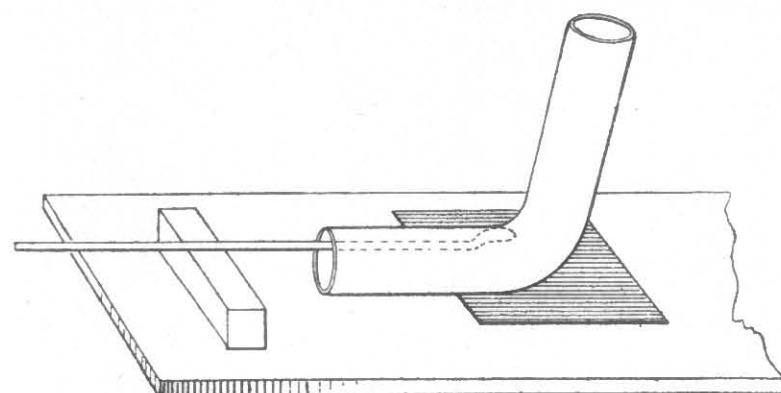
Bending Drawn-lead Pipe: 3rd stage.
